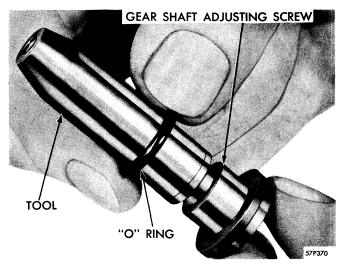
Installing Gear Shaft Adjusting Screw "O" Ring
